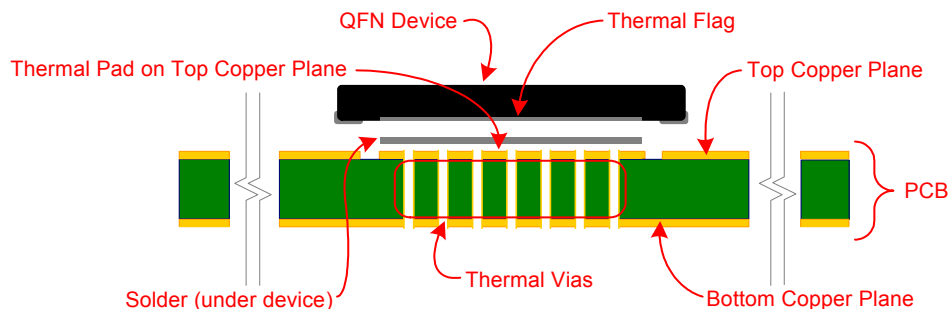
Cut-Away View of a QFN & PCB Structure on a 2-Layer PCB
